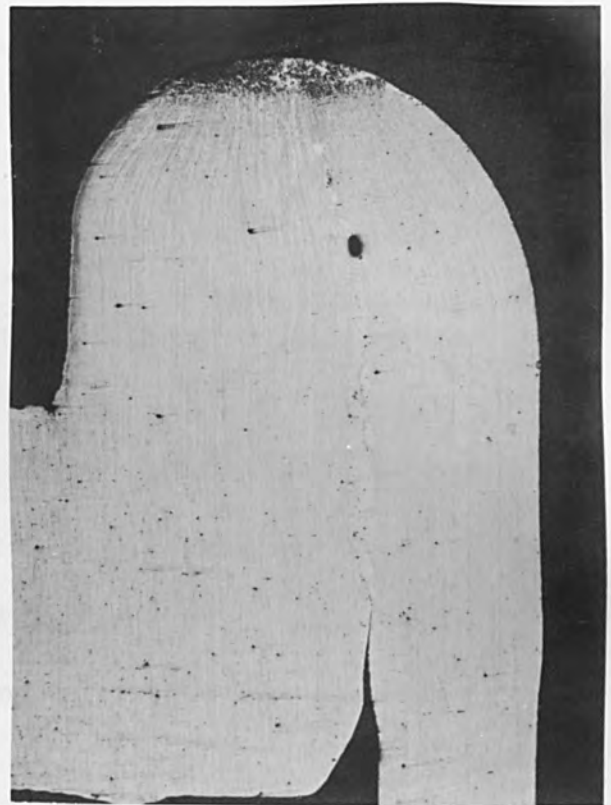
Type a - welding of S.A.P. 960 Montecatini. X25
